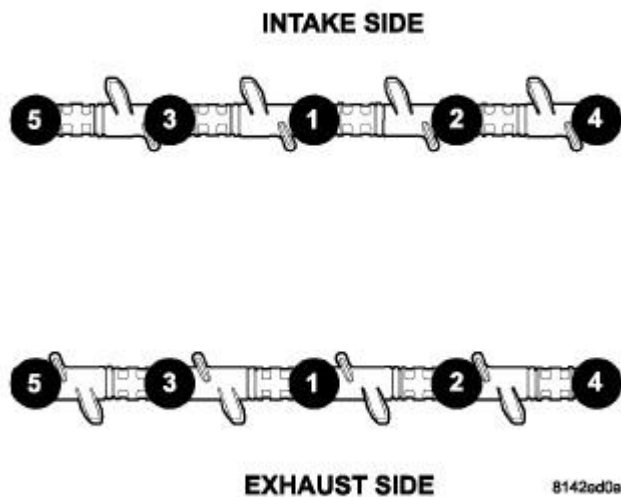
ROCKER SHAFT TORQUE SEQUENCE
